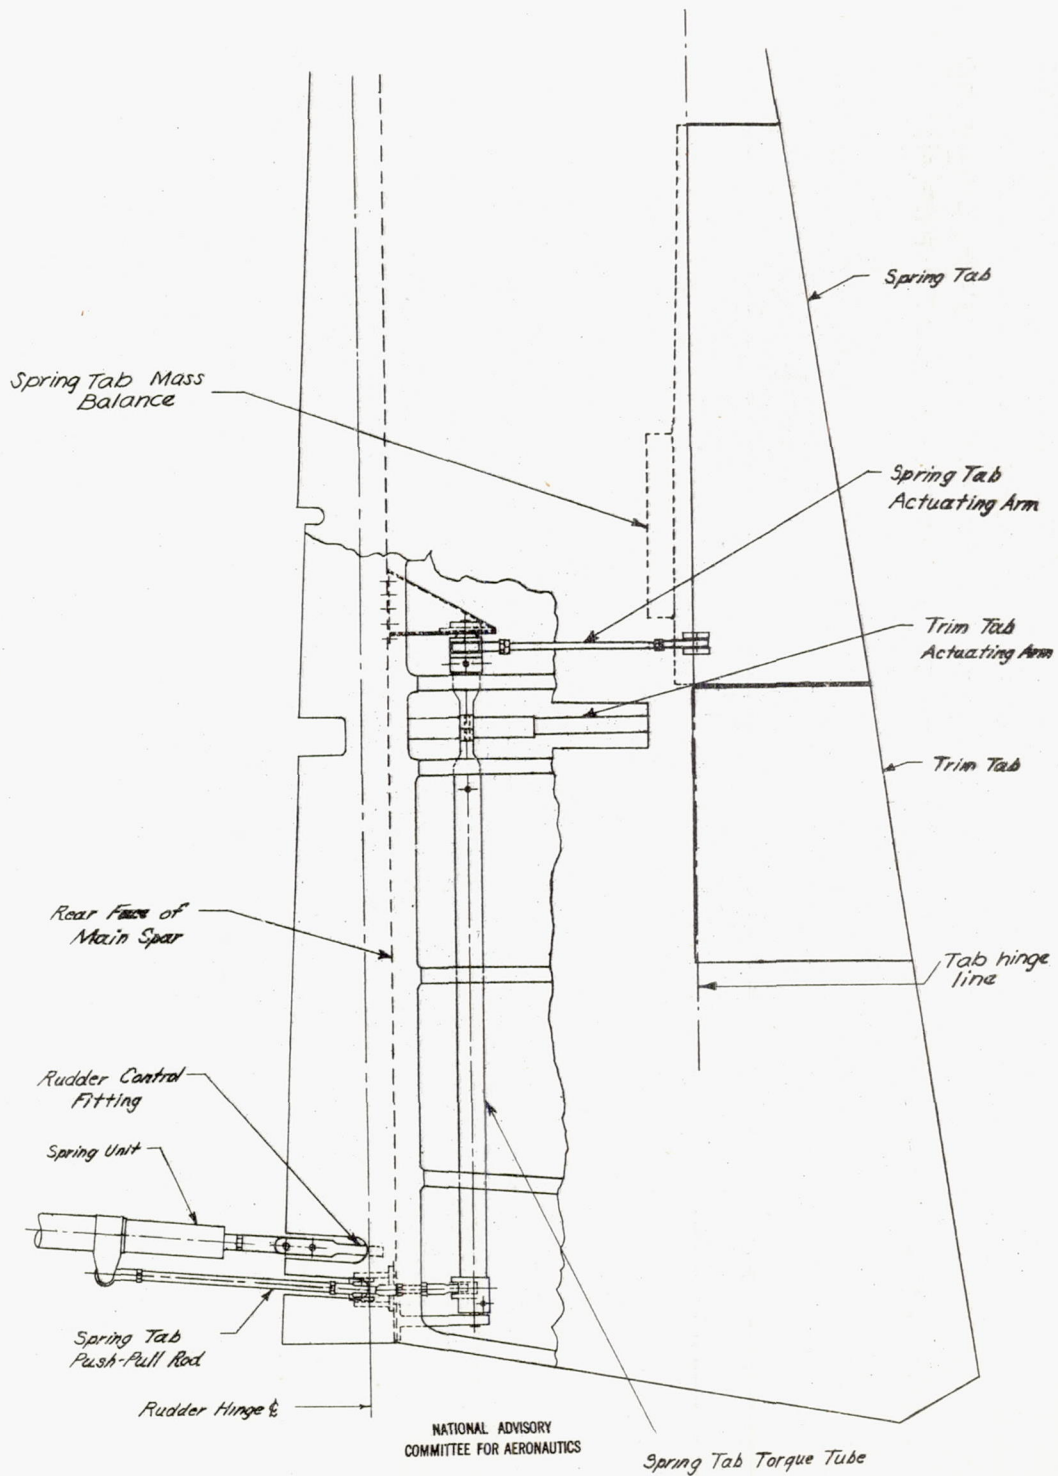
Assembly drawing of spring tab, F6F-3 airplanes.
